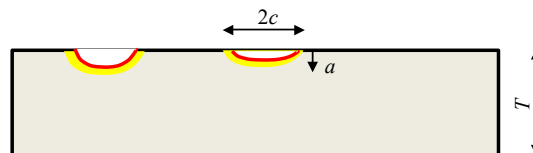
Elliptical surface flaws along the weld toe.
